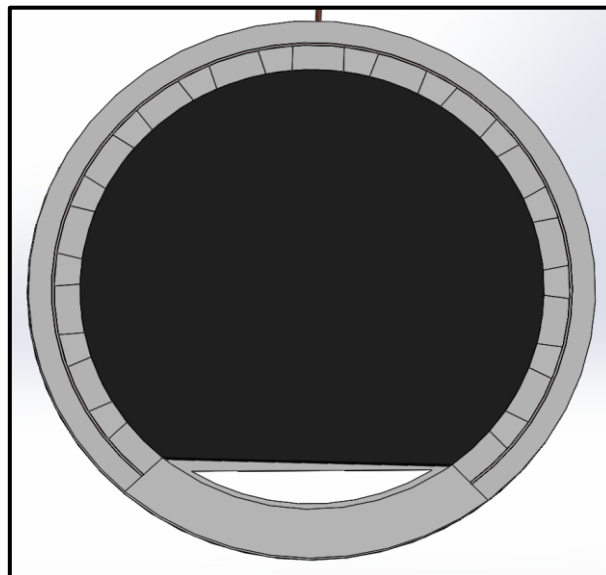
CAD-illustration Cut-view of the bottom channel in the New Design solution tube component with an electrode.
